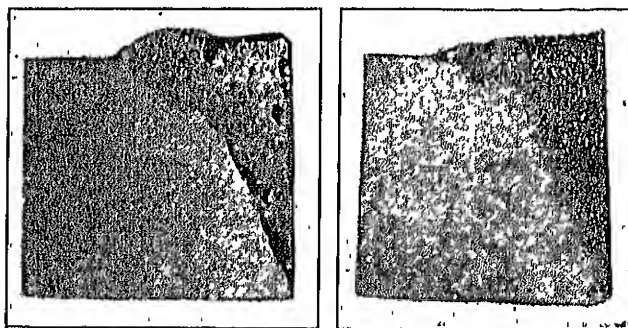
Welds Showing Poor and Good Fusion.
